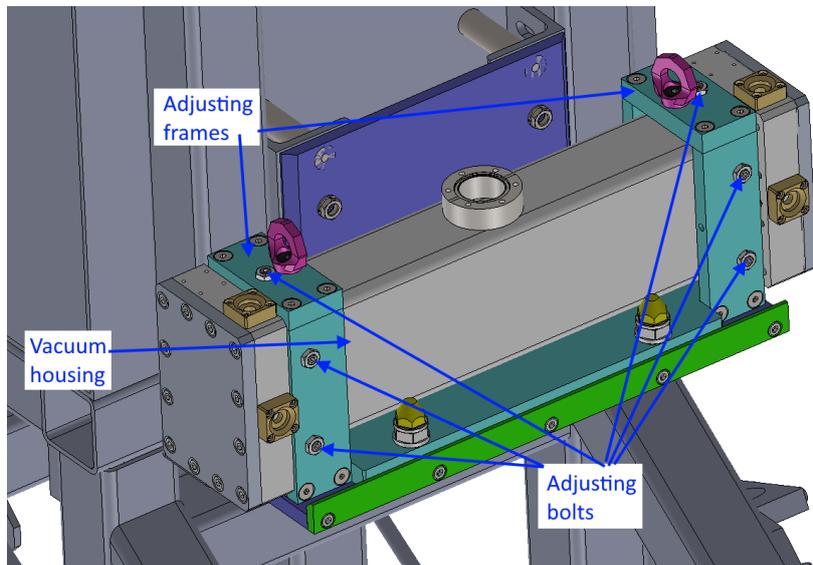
Showing the vacuum housing of the guide at the safety shutter and its adjusting bolts
